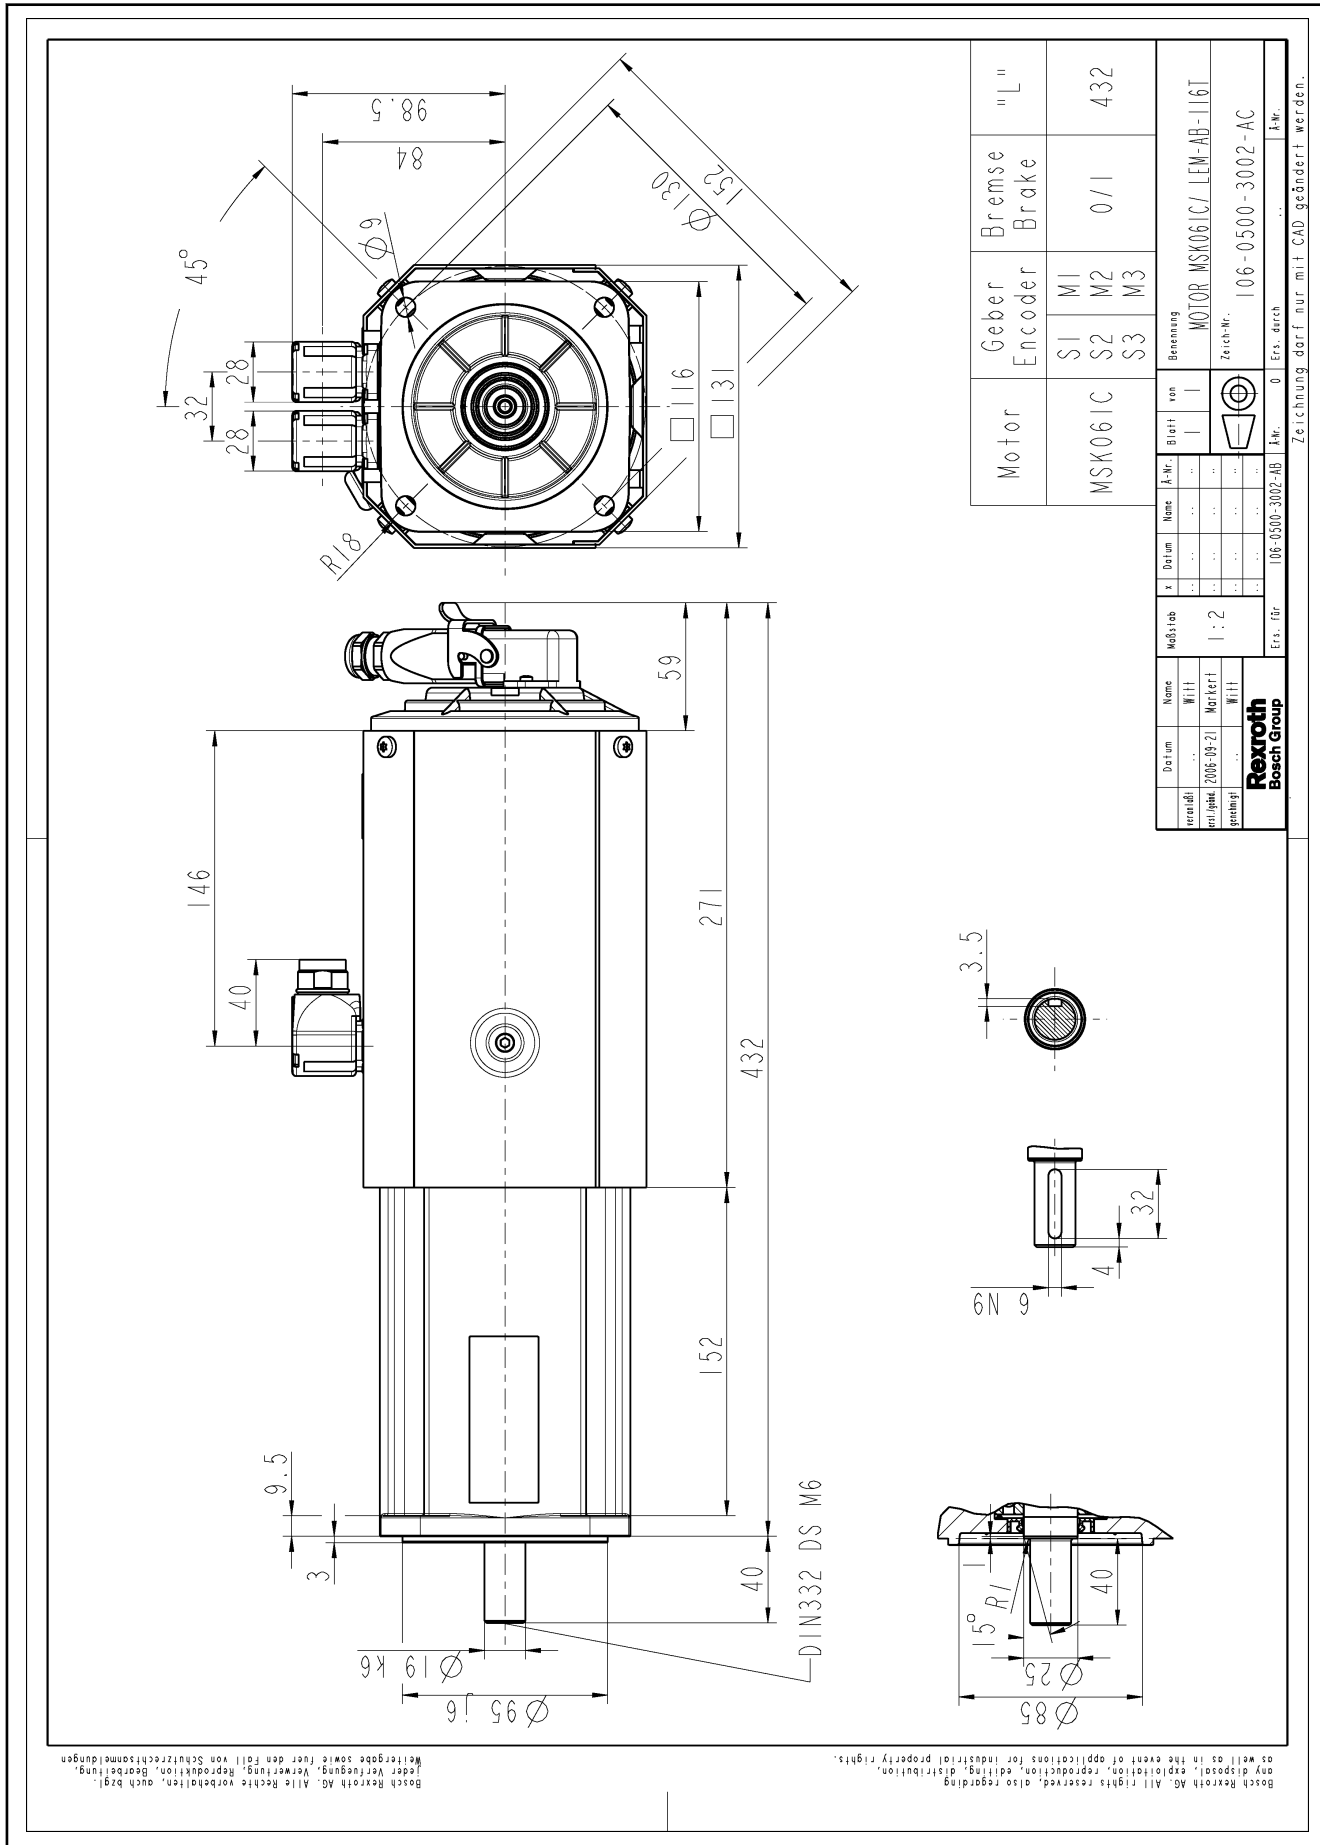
Dimension sheet MSK061 with axial fan unit
